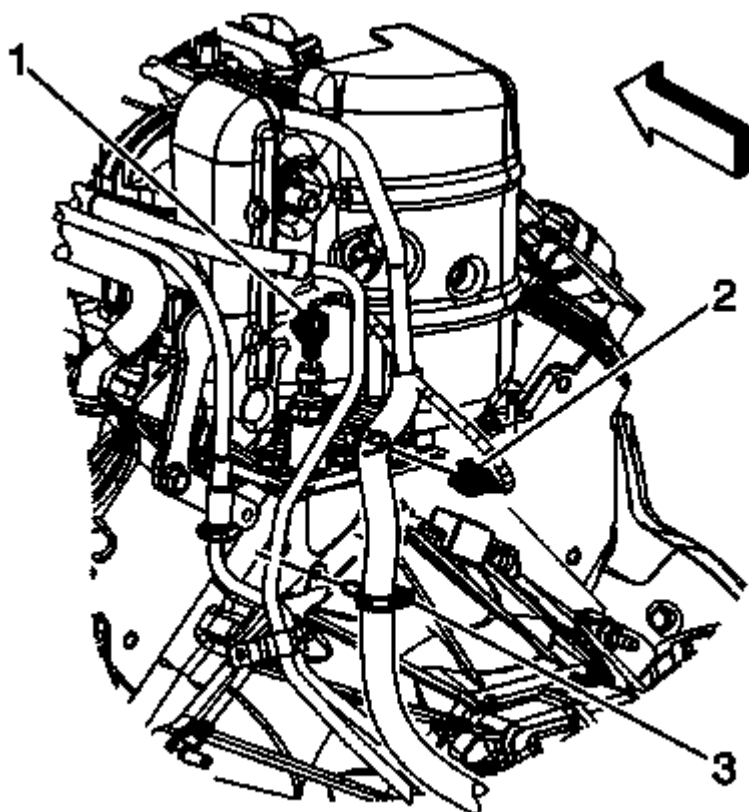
Engine Harness Electrical Connectors And Inlet Hose Clamp
